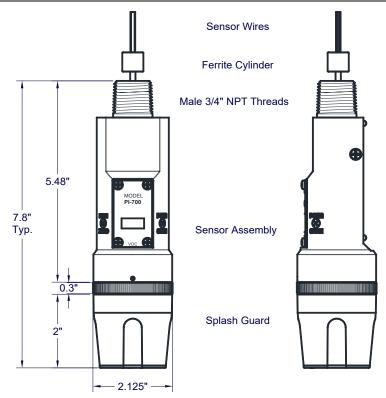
Outline and Mounting Dimensions (Sensor Assembly only)
